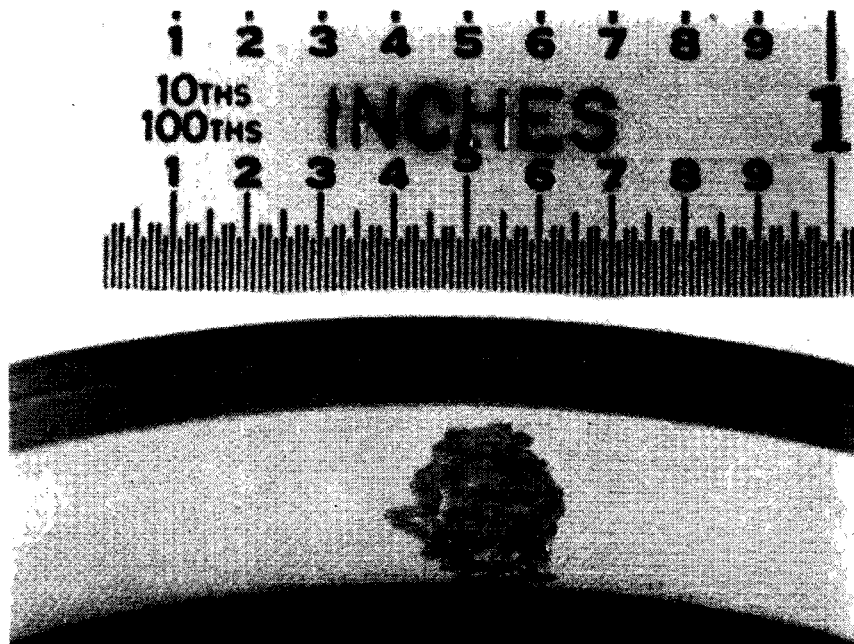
90-Degree Gearbox -407 Bearing Outer Race C/D,
